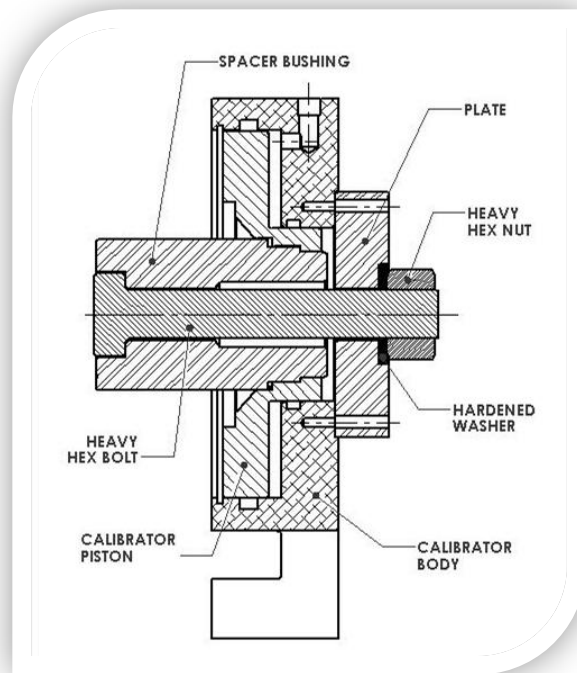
CROSECTION THRU CALIBRATOR, USING A SPACER BUSHING
